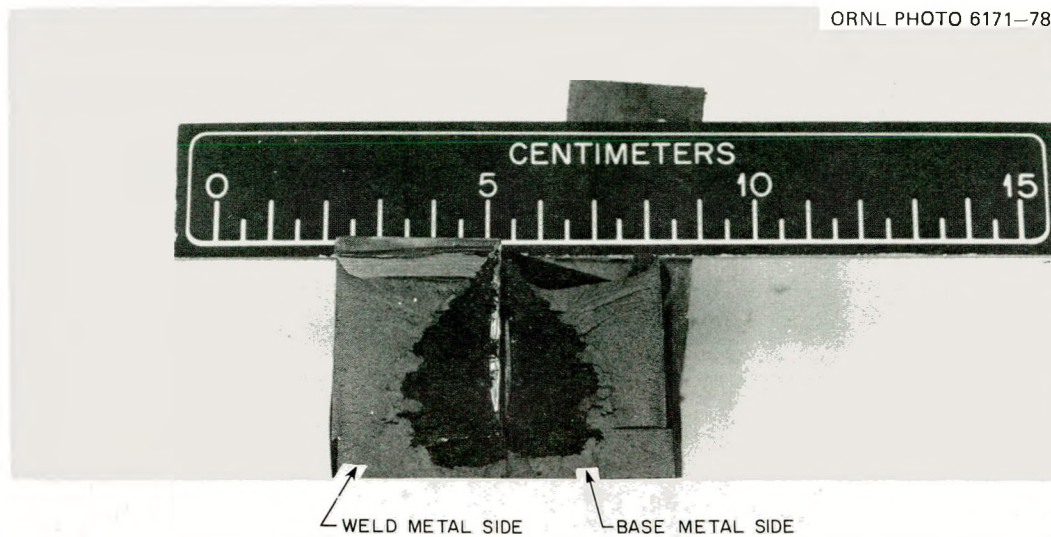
V-7B fracture surfaces in slab C exposed by splitting the chilled slab.
